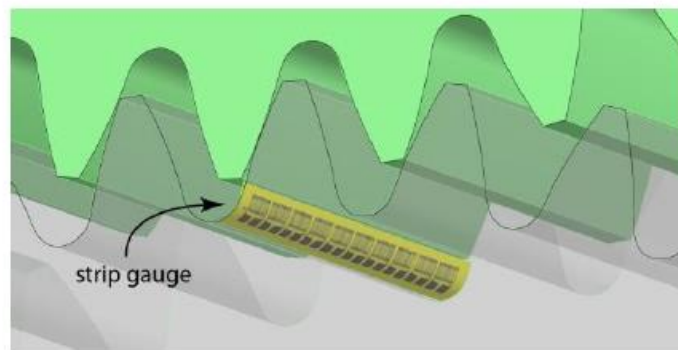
Strip gauge positioning at the root of a test gear tooth.
